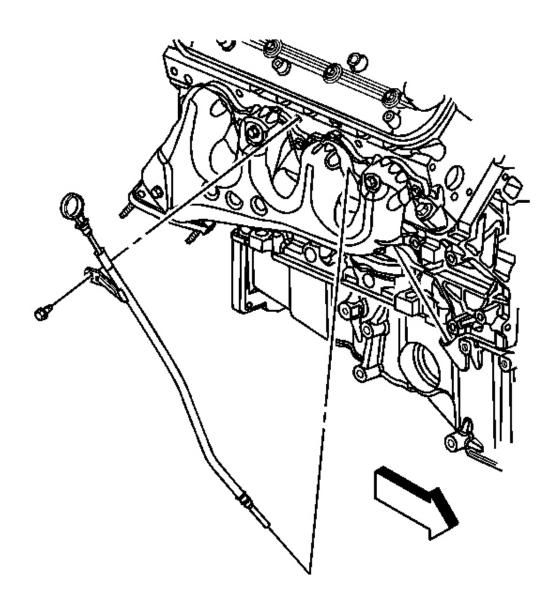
View Of Oil Level Indicator Tube Courtesy of GENERAL MOTORS CORP.
